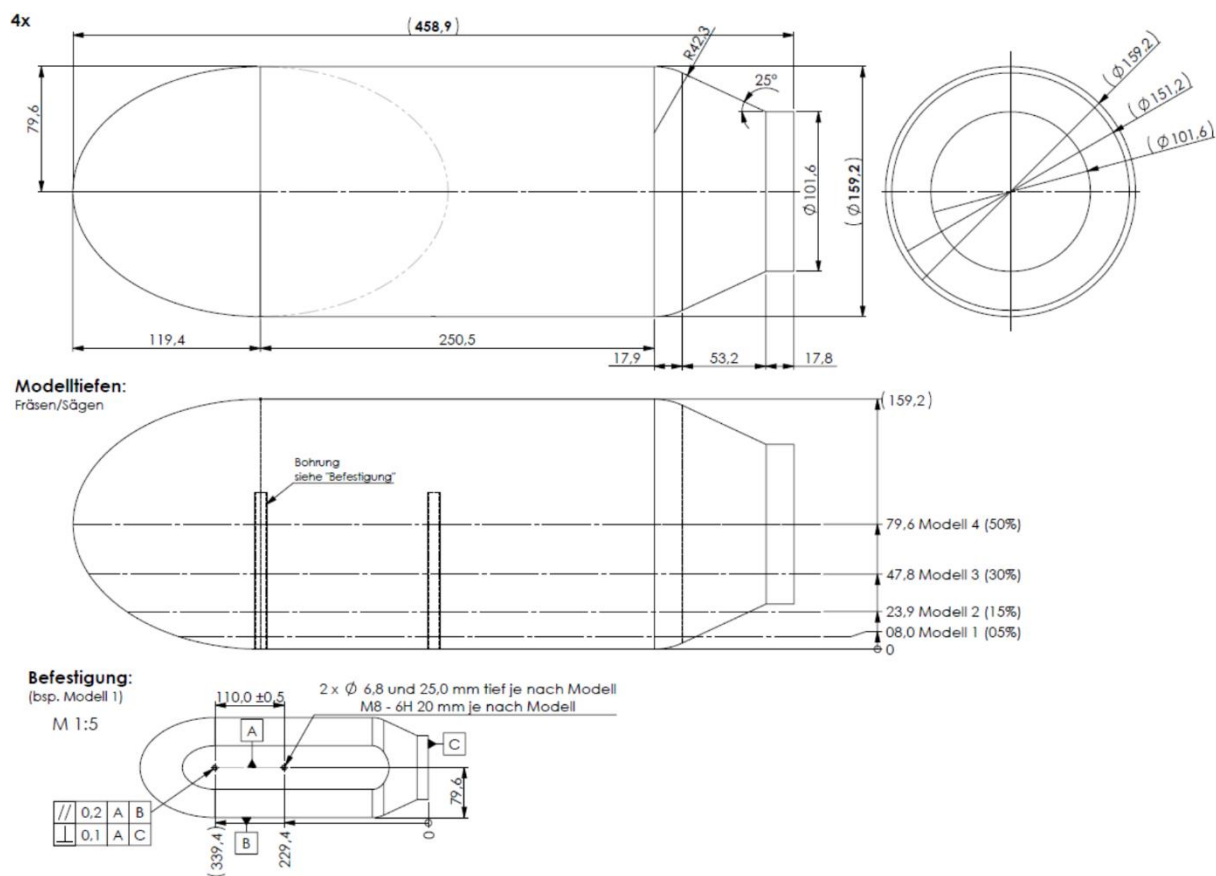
Technical drawing of the model of a 1000 lb GP bomb.
